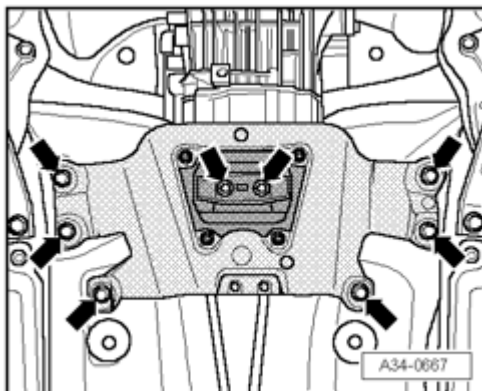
Left Transmission Support, Bolts And Transmission Mounting -- Vehicles With 8-Cyl. Engine
